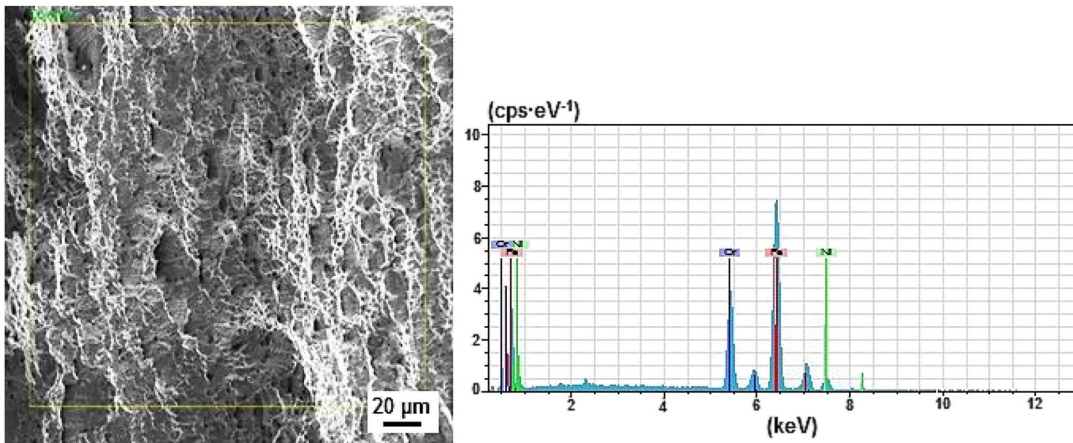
Fractured-surface EDS analysis of the S3 sample after tensile test.
